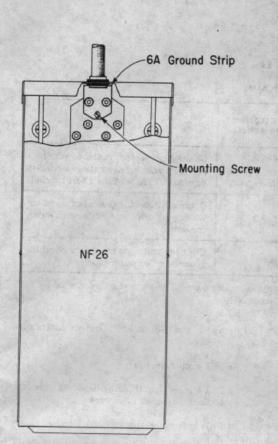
6A Ground Strip Installed in NF26 Cable Terminal
